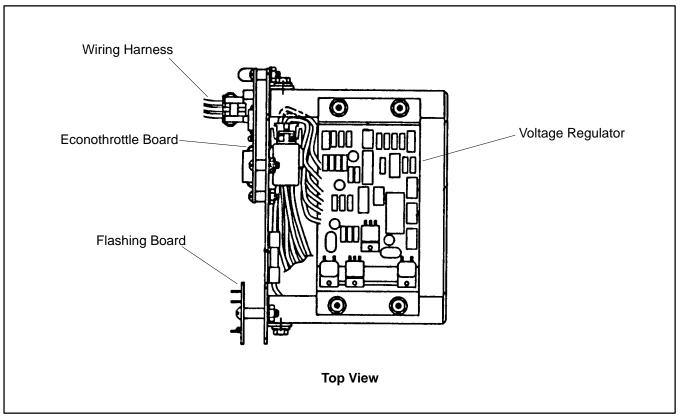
Voltage Regulator, Econothrottle Board, and Flashing Board.
